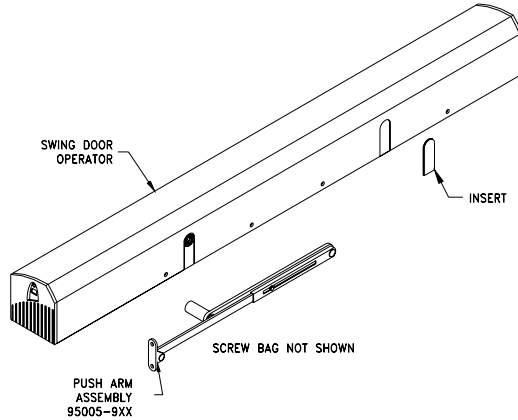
SYSTEM COMPONENTS – PUSH ARM
